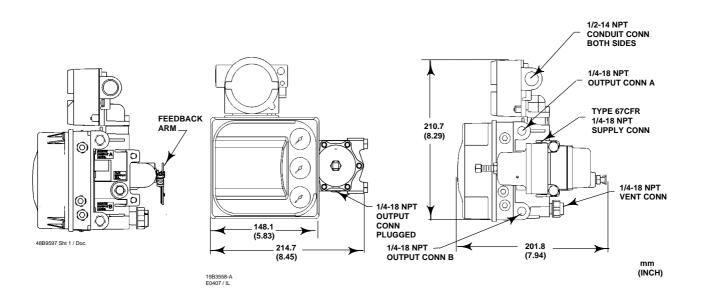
Dimensions for Type DVC6030 Digital Valve Controller with Integrally Mounted Filter Regulator
